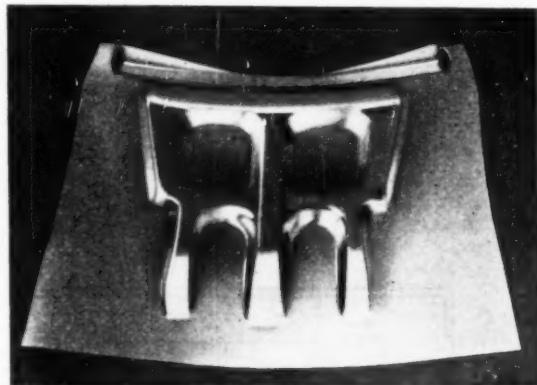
Cowl flap inner stamping formed on the drop hammer
